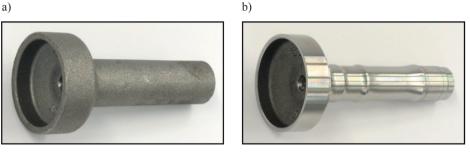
The view of a sample detail: a) blank (forged), b) machined element
